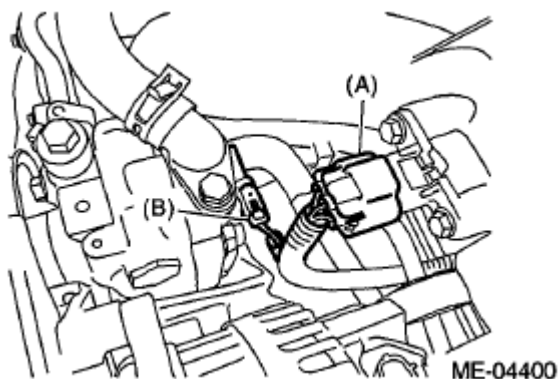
Identifying Manifold Absolute Pressure Sensor And Power Steering Pump Connectors
